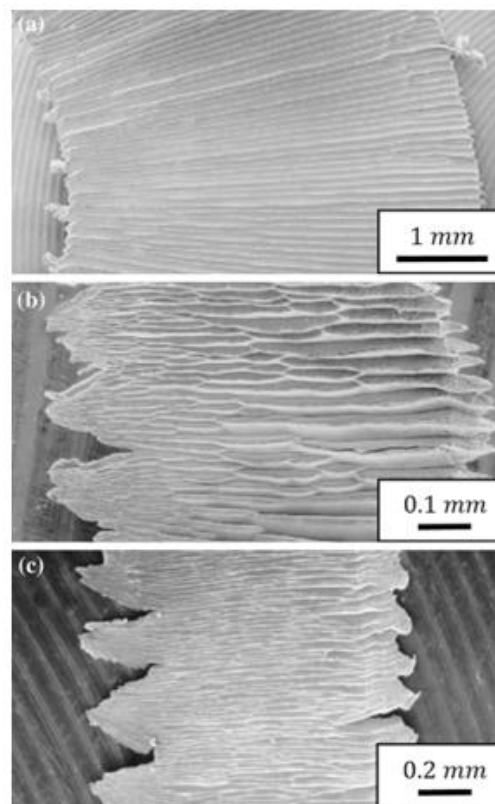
Enlarged ($\times 100$) image of chips (workpiece material – AISI 1550 steel) produced by cutting tools with different geometries: a – orthogonal cutting with a rake angle of $\vartheta = 6^\circ$; b – oblique cutting with a rake angle $\vartheta = 6^\circ$ and a nose radius $r = 1.2$ mm; c – orthogonal cutting with a rake angle of $\vartheta = 6^\circ$ using a round insert
